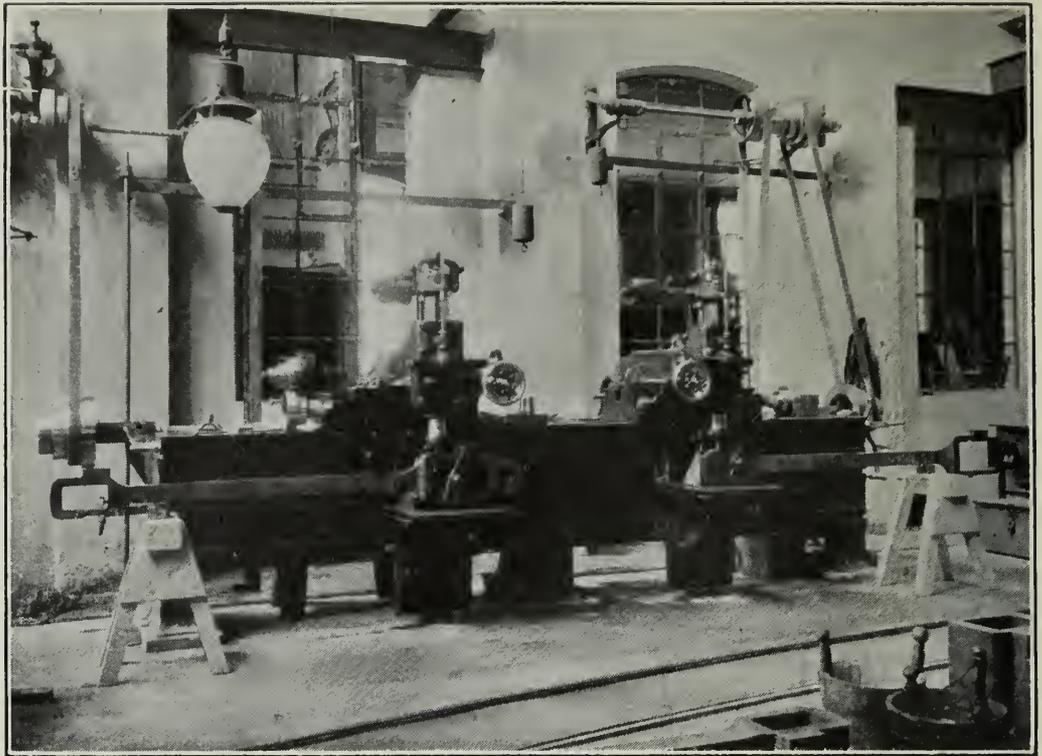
DOUBLE-SPINDLE LOCOMOTIVE MAIN-ROD OIL-CUP MILLING MACHINE.
